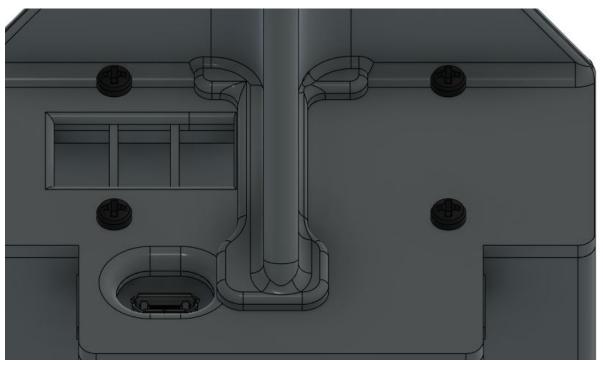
View of spike enclosure placed on battery and PCB enclosure with screws next to holes.
